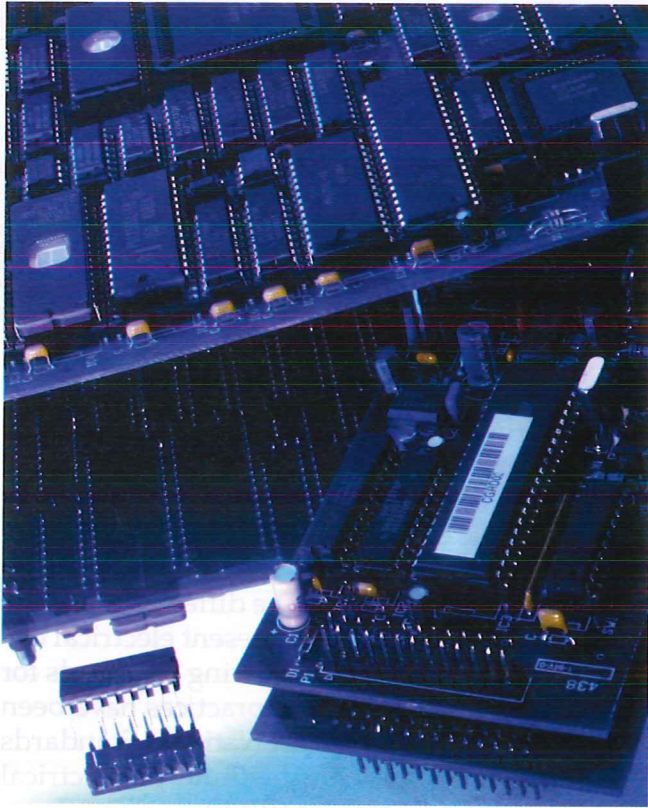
Special drafting skills and a basic knowledge of electronics are necessary for making drawings of devices such as integrated circuits and circuit boards.
